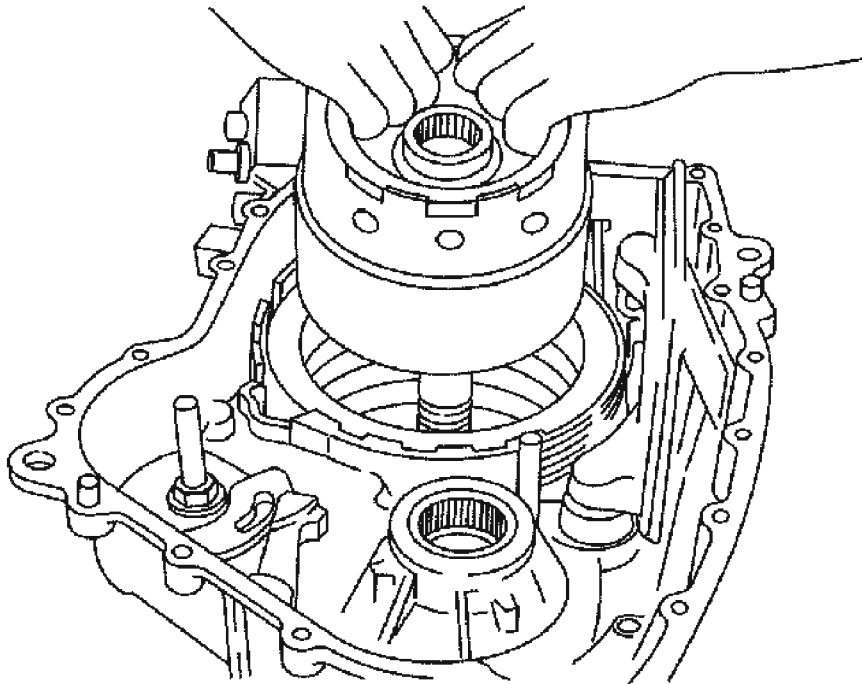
Removing No 4 Turbine Shaft Thrust Bearing
